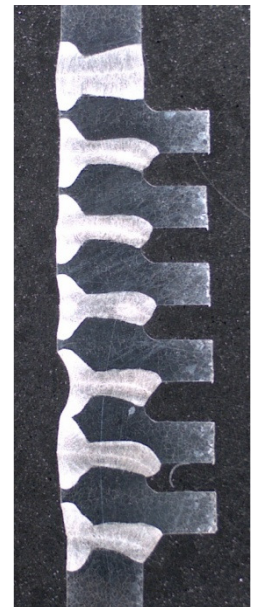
Laser weld regions between the plates: Mixed acid reagent etch.
